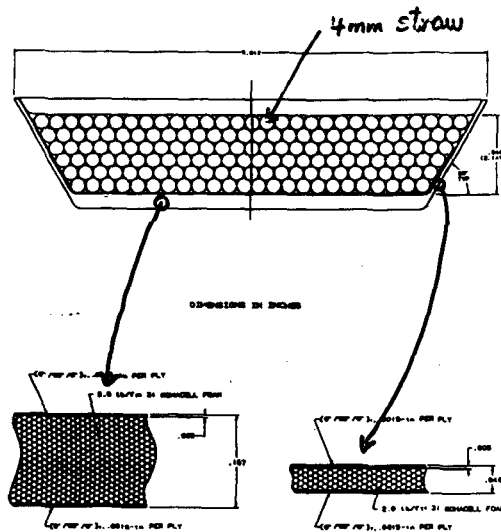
Details of the cross-sectional view of the non-trigger module.
